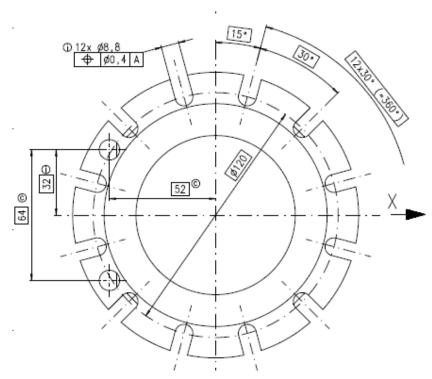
View to the flange o the cold BPM. On the left hand side, one can see the two pinholes for the dowel pins for precise alignment of BPM and quadrupole. A more detailed drawing can be provided on request.
